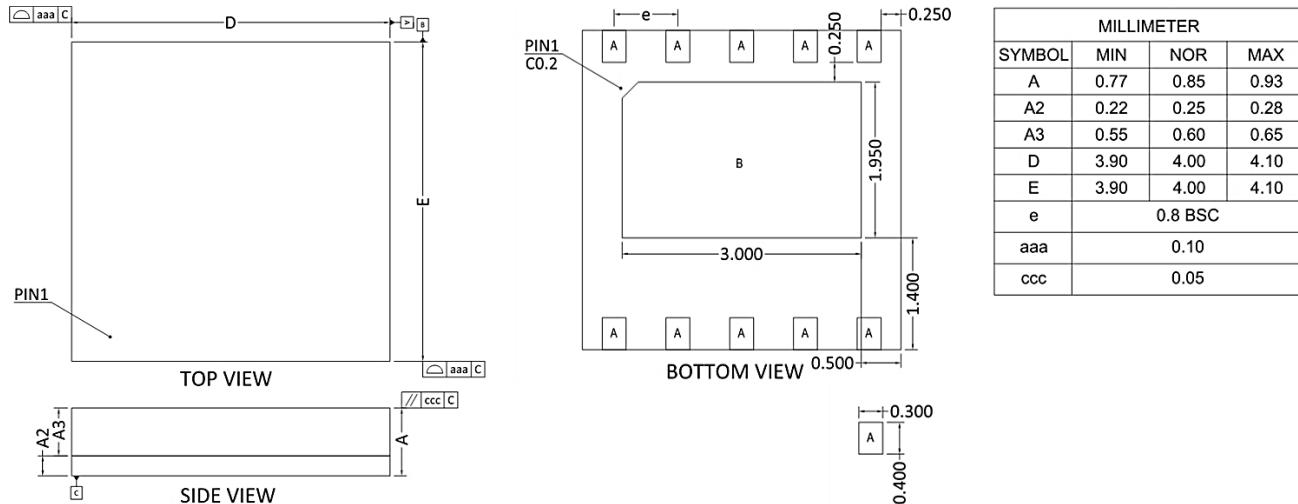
LGA10 4x4 Package Shape and Dimension
